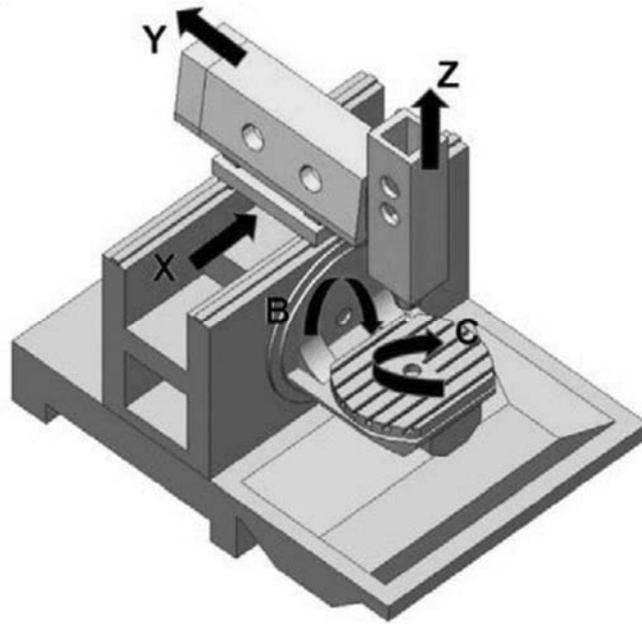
A five axes CNC machine diagram (Bologaa, Breaza, Racza, & M., 2016, p. 185).
